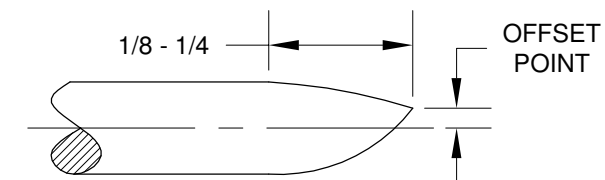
FABRICATING THE LOWER COWL HINGE PINS
